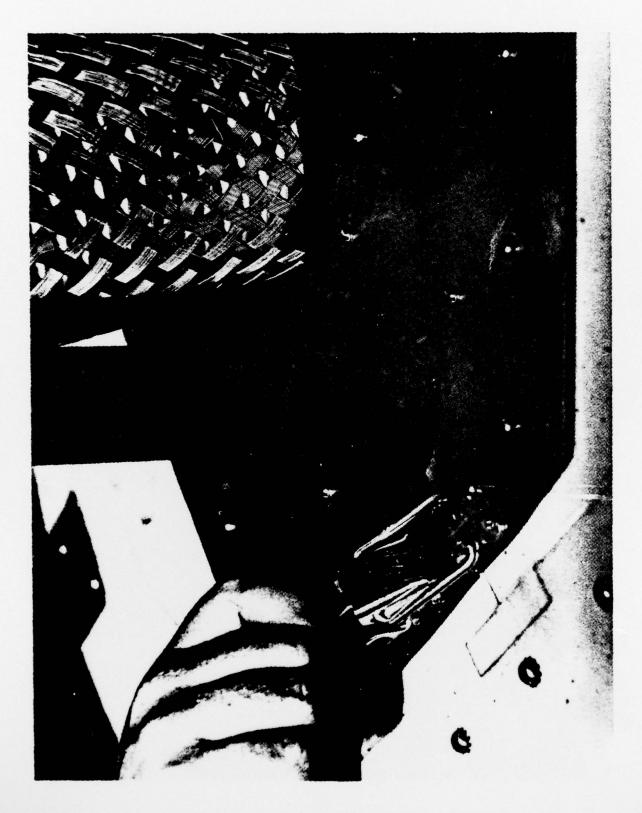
TOP SLIDES BEING LOCKED IN POSITION 41
